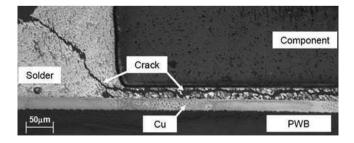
Microsection of SnPb solder joint of a ceramic leadless component after accelerated stress test. The crack path has fully developed. The electrical and mechanical properties of the solder joint are totally gone, or at least they are very unstable. Note that the electrical and mechanical connect might still exist in some part of the solder joint; figure shows only two-dimensional microsection of the solder joint
